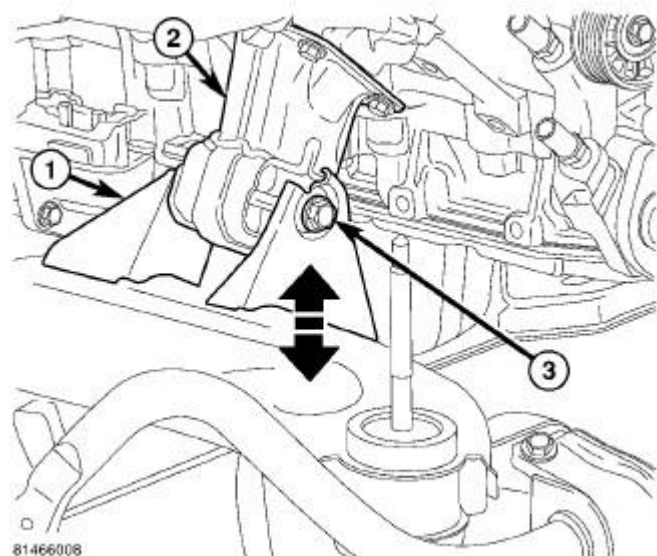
Removing/Installing Transmission To Engine Bolts
